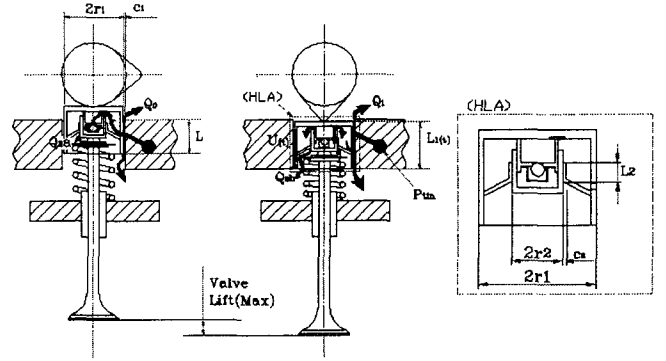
The geometry of hydraulic tappet and the flow schematic drawing.
